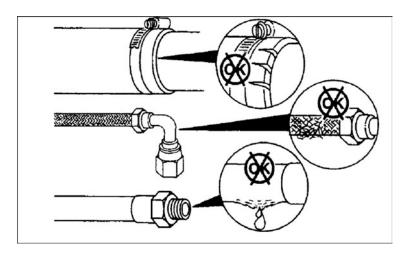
HOSES AND FUEL LINE INSPECTION
